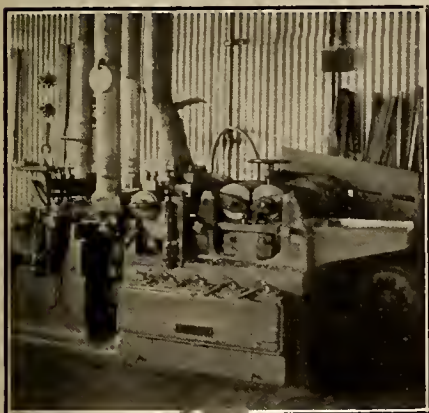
Vonnegut moulder showing controllers at the front of the machine.
